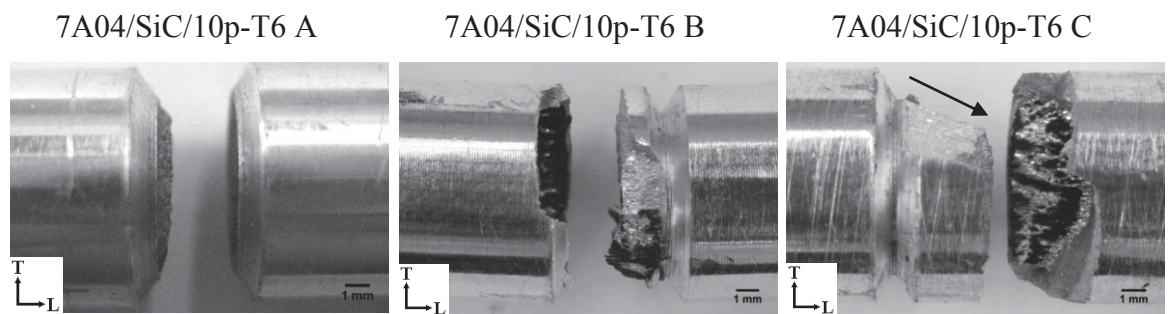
Side view of the circumferential notch tension precrack fracture surface for the 7A04/SiC/10p-T6 aluminium materials. The letters A, B and C are used in this section to designate the test specimens.
